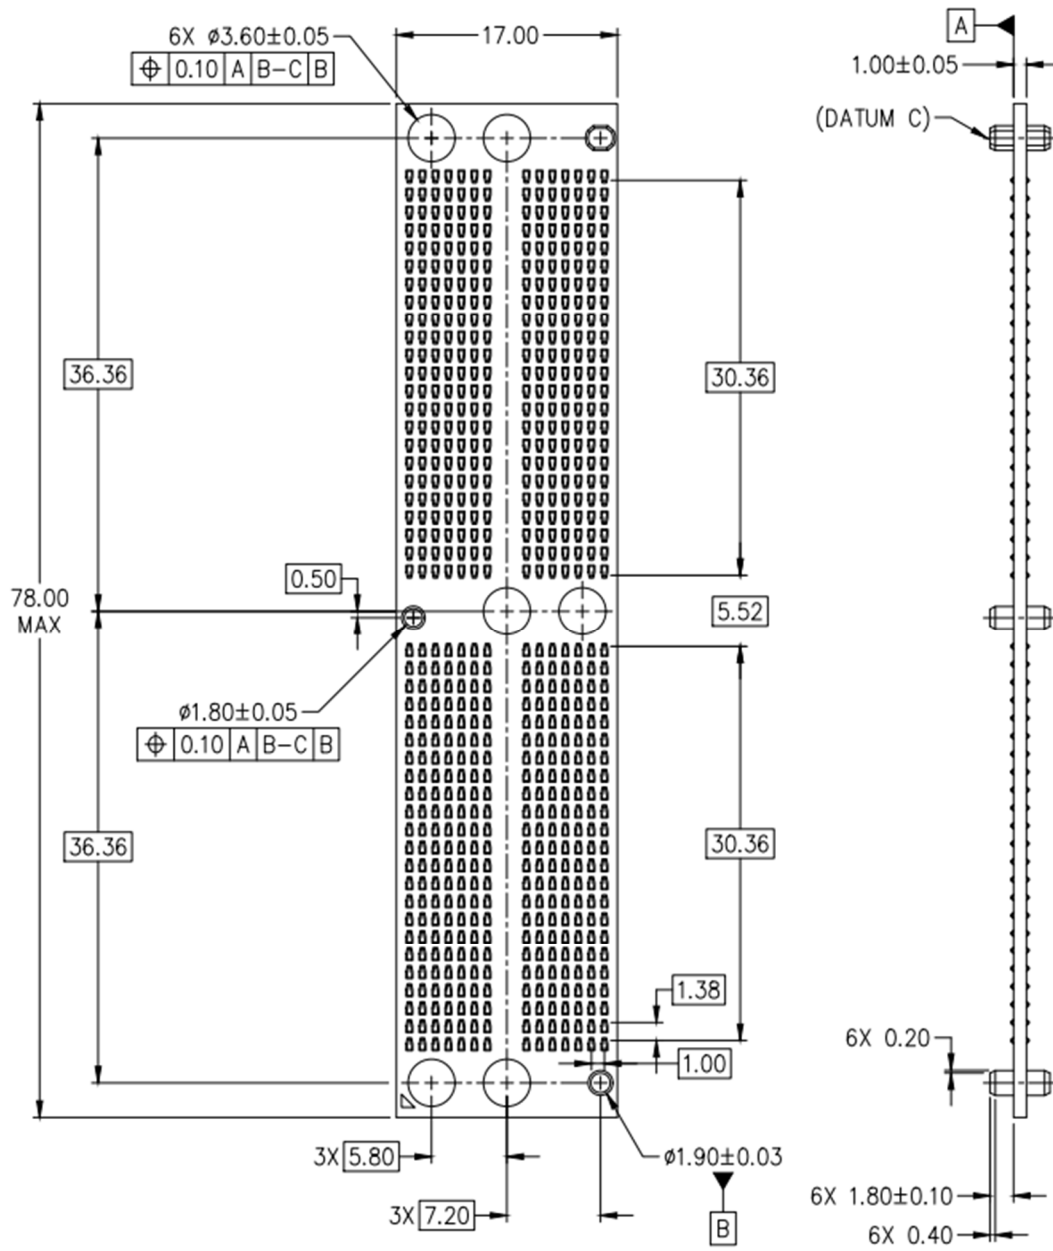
LPDDR5 CAMM2 Connector Socket Outline
